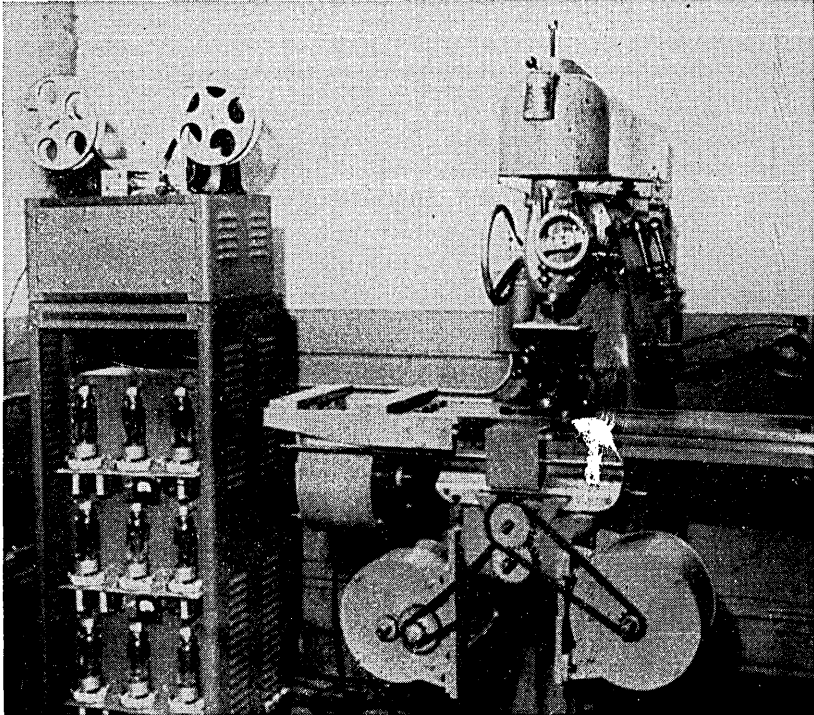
Punched-film-controlled milling machine powered by special step motors (Courtesy Industrial Controls Corp.)
